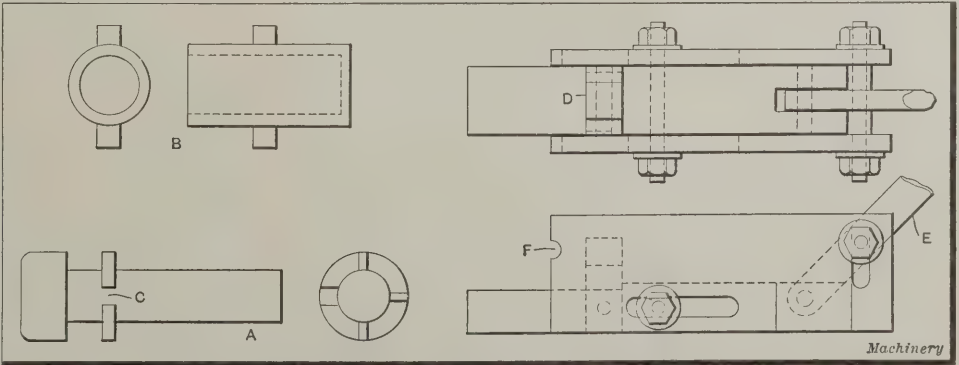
Mandrel and Fixture used for babbitting Bearing B
